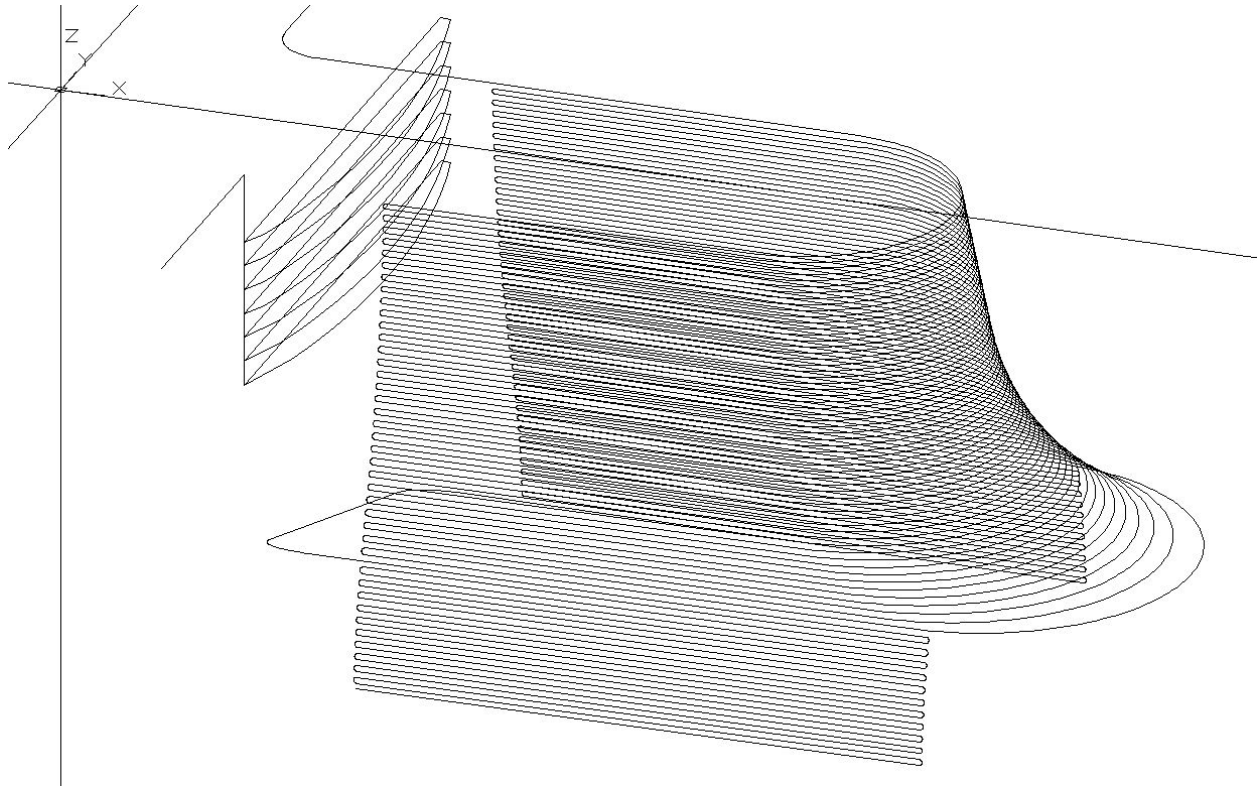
Heel-Rim Radiusing Tool Path. This tool-path insures that the heel of the banjo neck fits properly against the pot.
